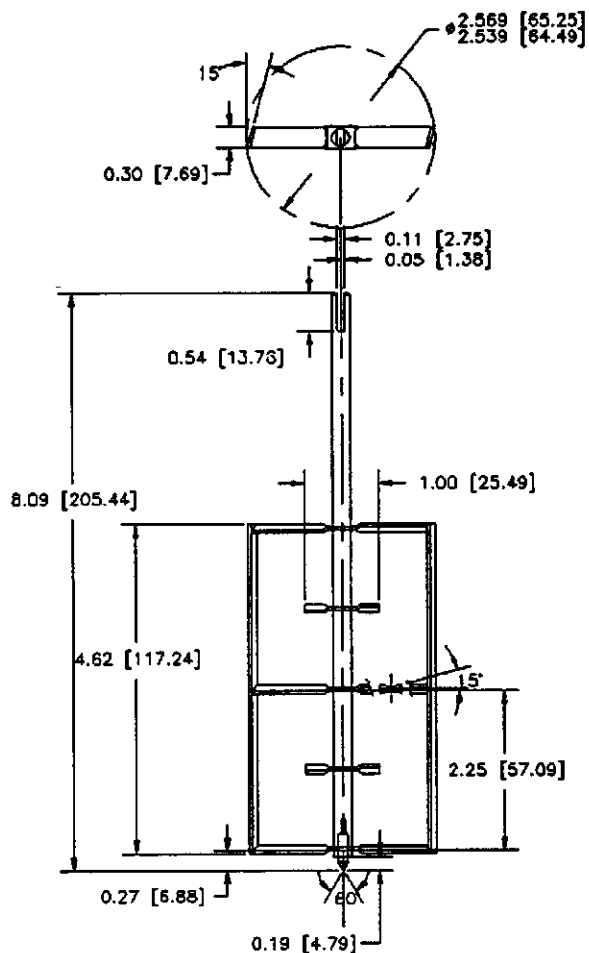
Container Assembly Typical Atmospheric Pressure Consistometer
